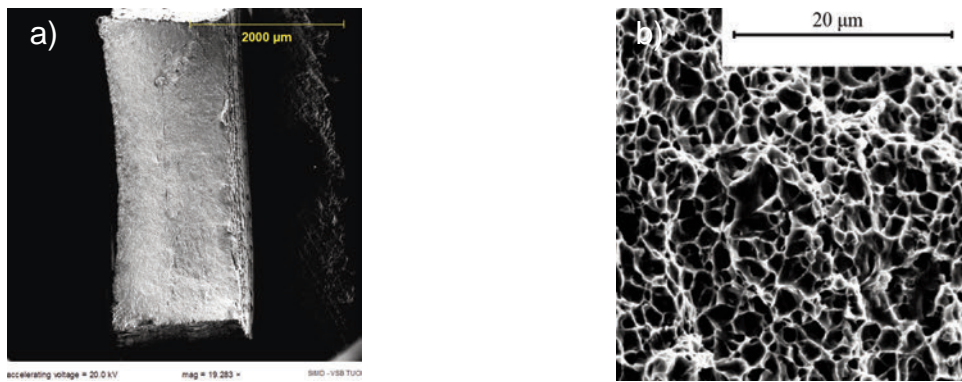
Fracture area of Ck55 steel after tensile test: after the 3rd pass – perpendicular sample, macrograph (a); detail (b)
